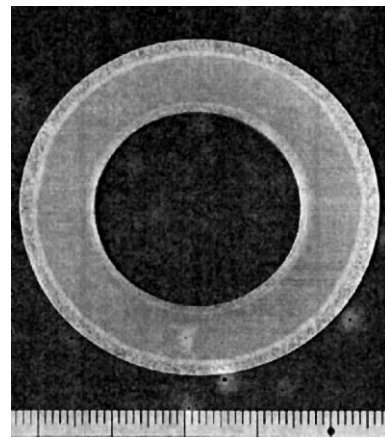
Cross-section of manufactured annular billet with inner wall tube made of 17Cr stainless steel. Outer diameter: 48.9 mm and inner diameter: 28 mm.
